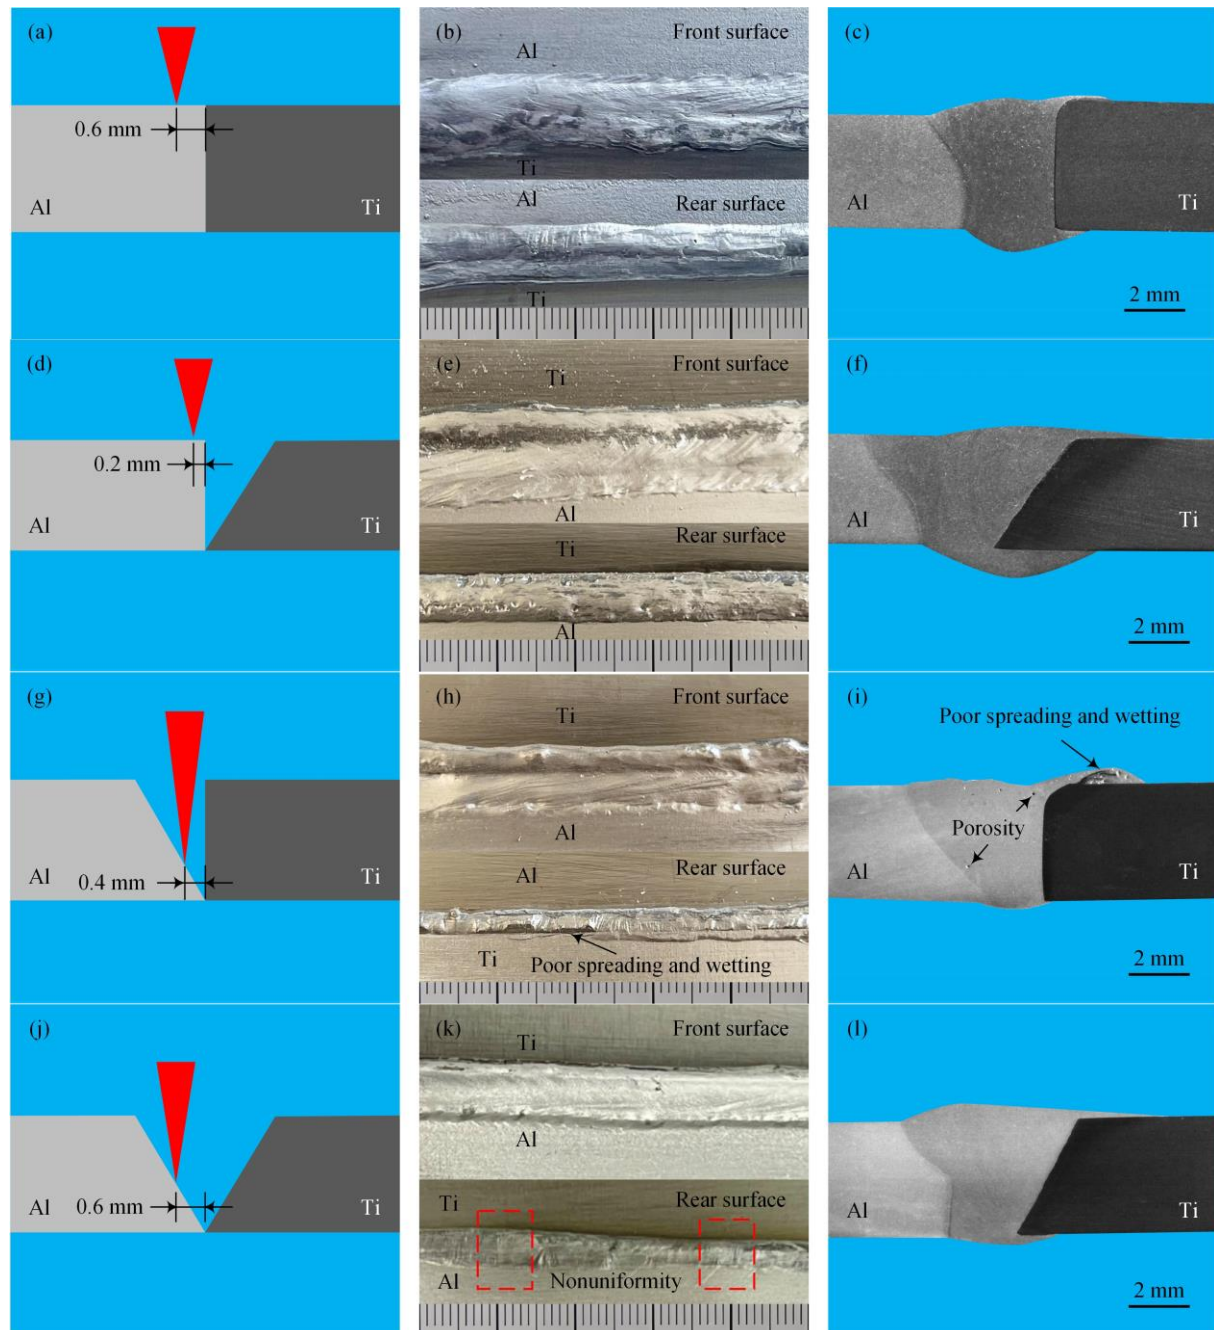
Laser offset distances and welds formation with different groove types: (a–c) I-shape; (d–f) V-shape on Ti side; (g–i) V-shape on Al side; (j–l) V-shape on both sides. Unit: mm.
